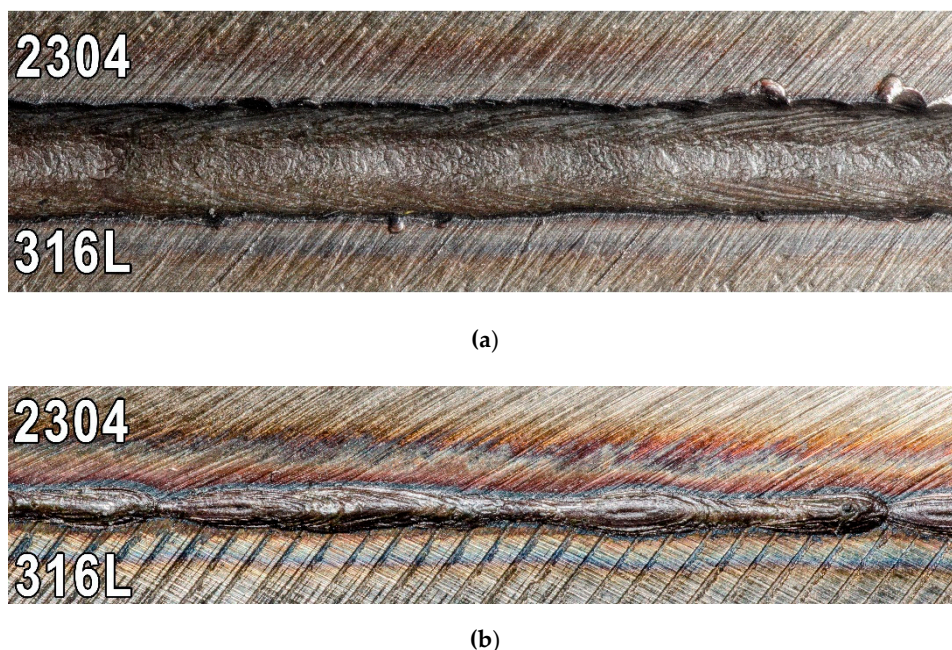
View of the welded joint: (a) face side and (b) root side.
